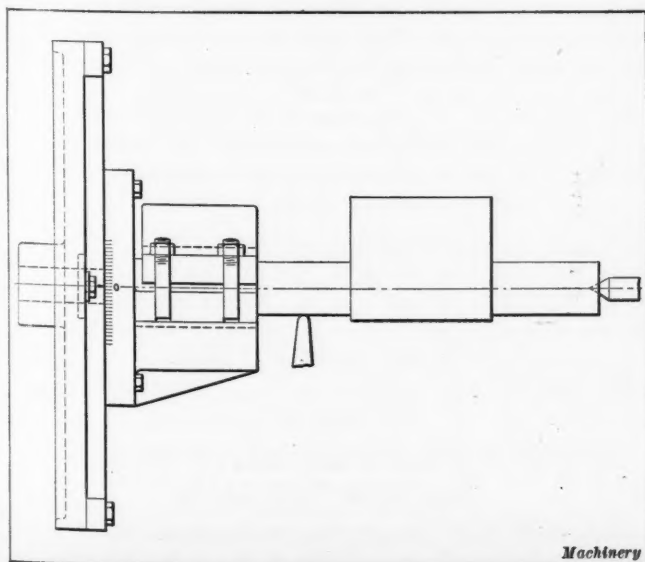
Crankshaft Turning Fixture in Position for turning Bearings
